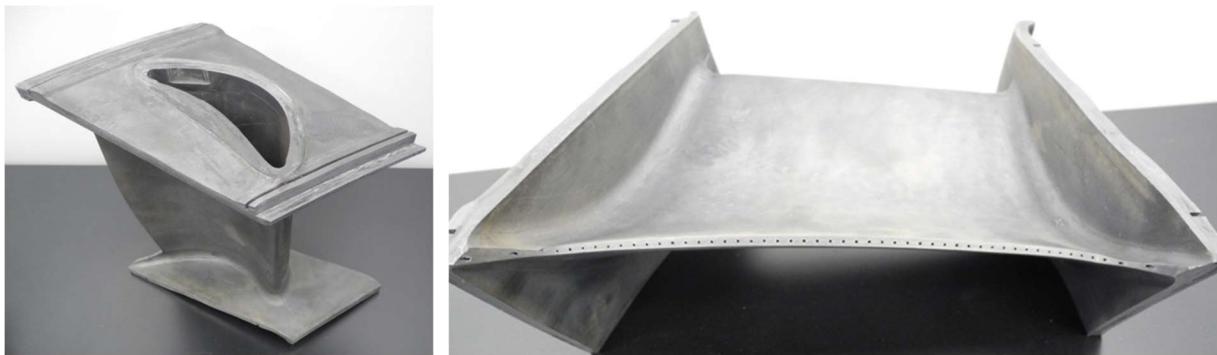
Initial CMC vane fab trial with machined surfaces and cooling holes
